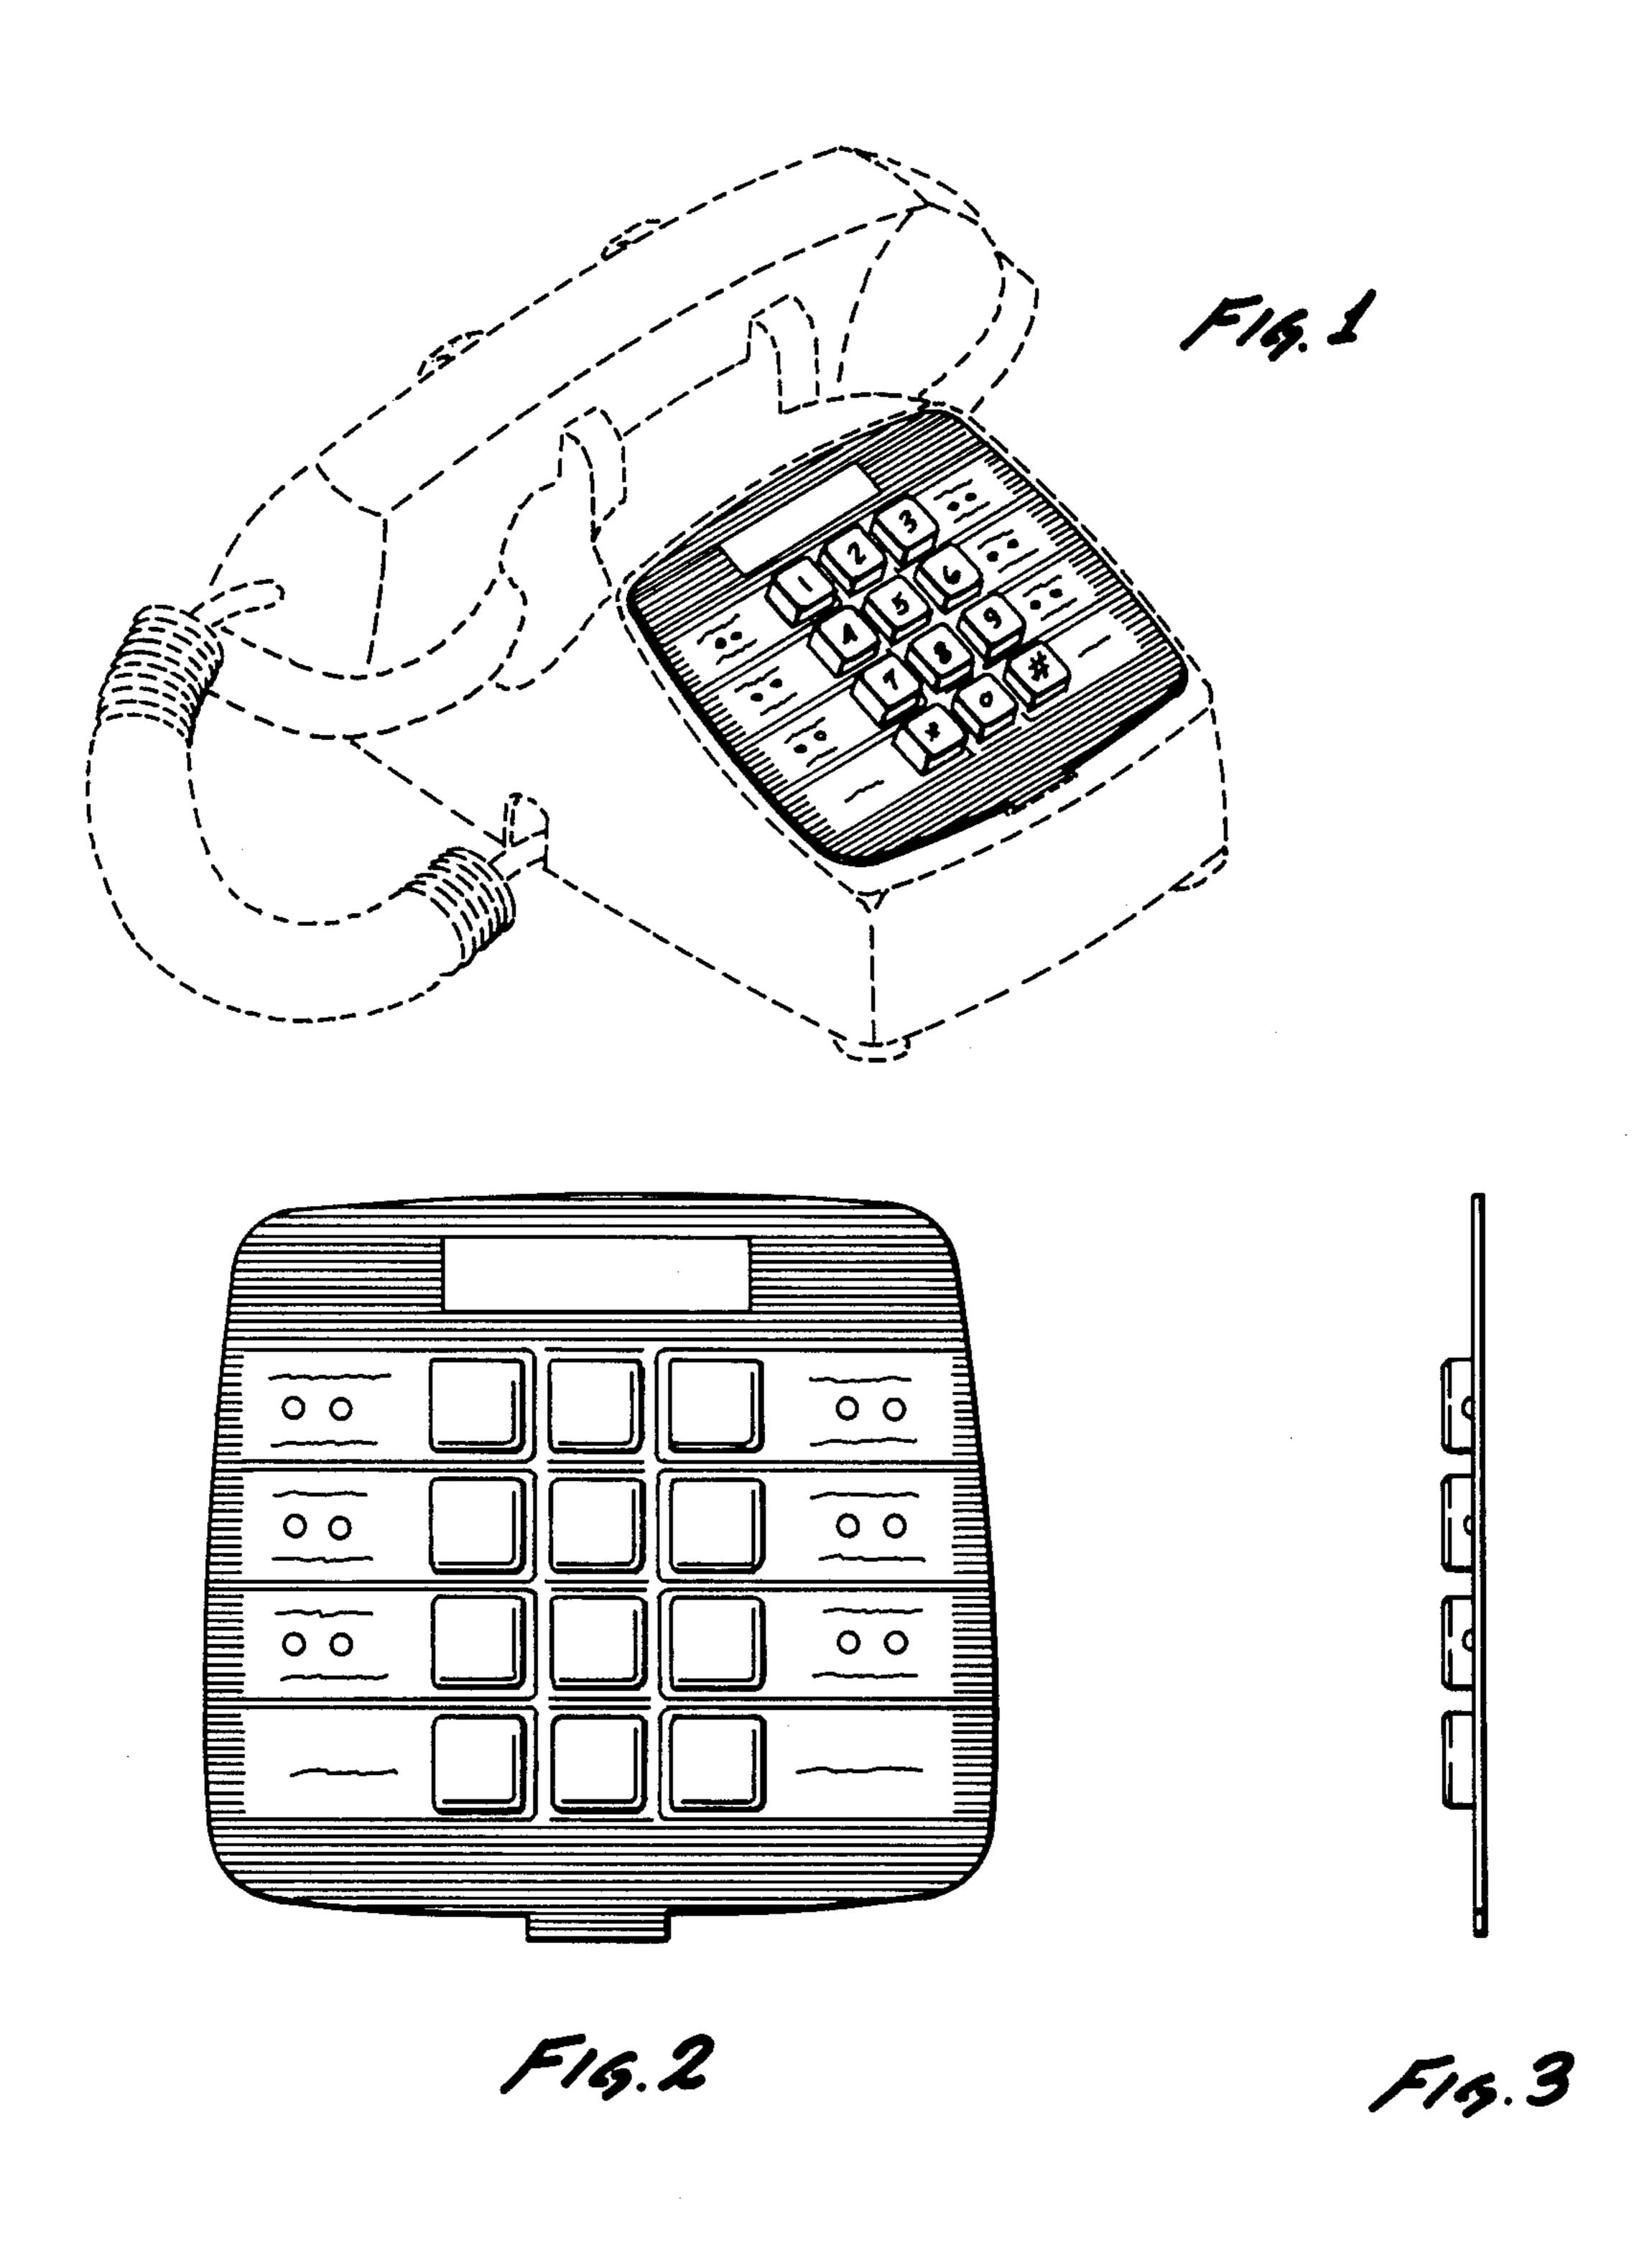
is a side edge view of the embodiment of FIG. 2. FIG. 4 is a front edge view of the embodiment of FIG. 2.
